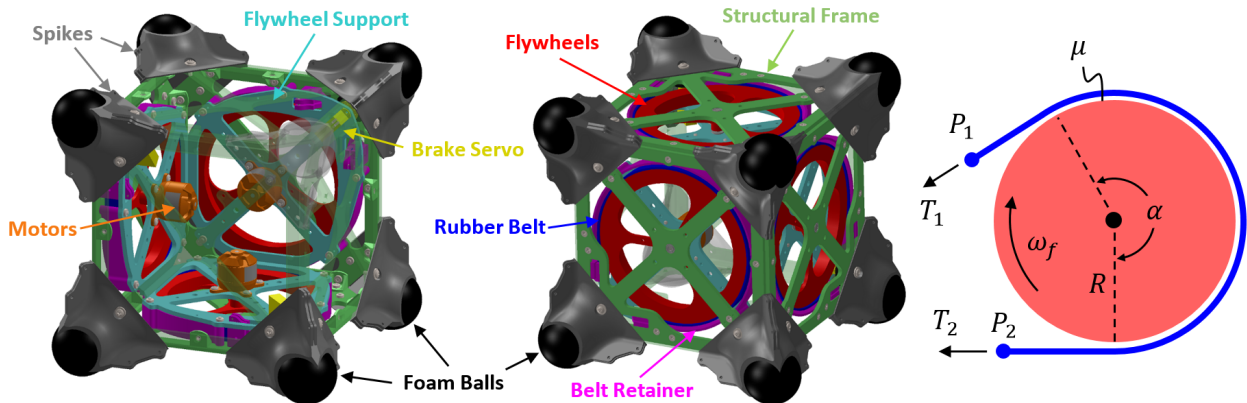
Left: CAD model of prototype, annotating key components. Right: Schematic of *band brake* mechanism.
